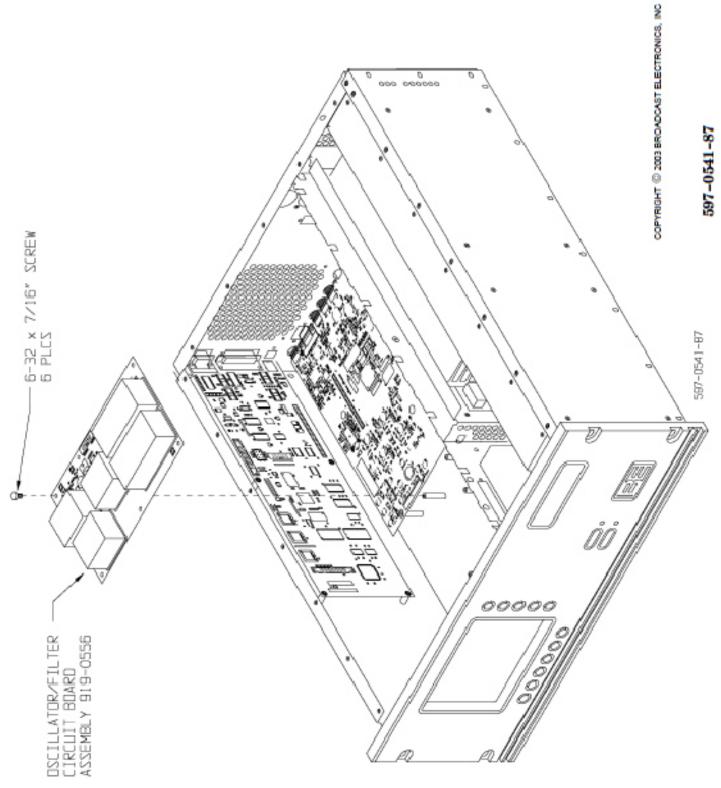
FXi OSCILLATOR BOARD REMOVAL AND REINSTALLATION
